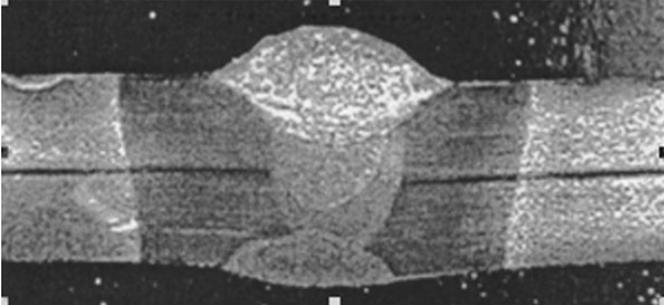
Macrograph of the welded joint - S355J2G3 steel
